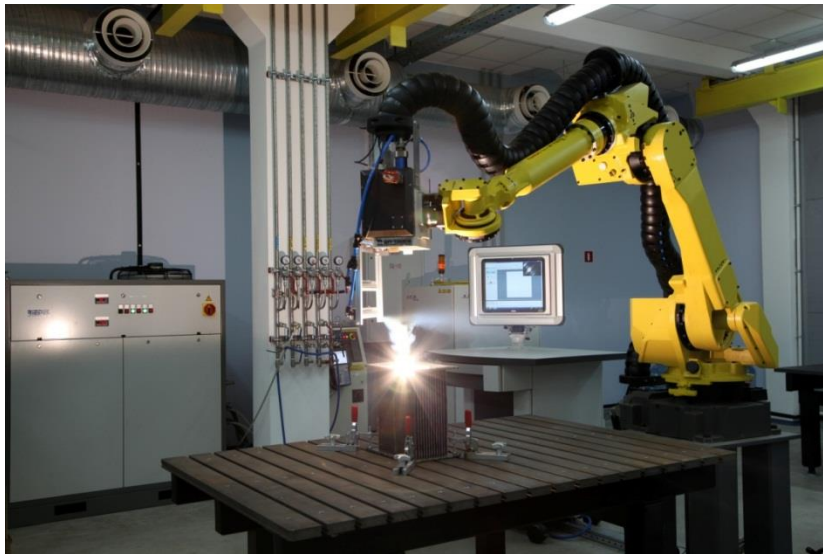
Robotized system for laser welding of maritime machinery items
